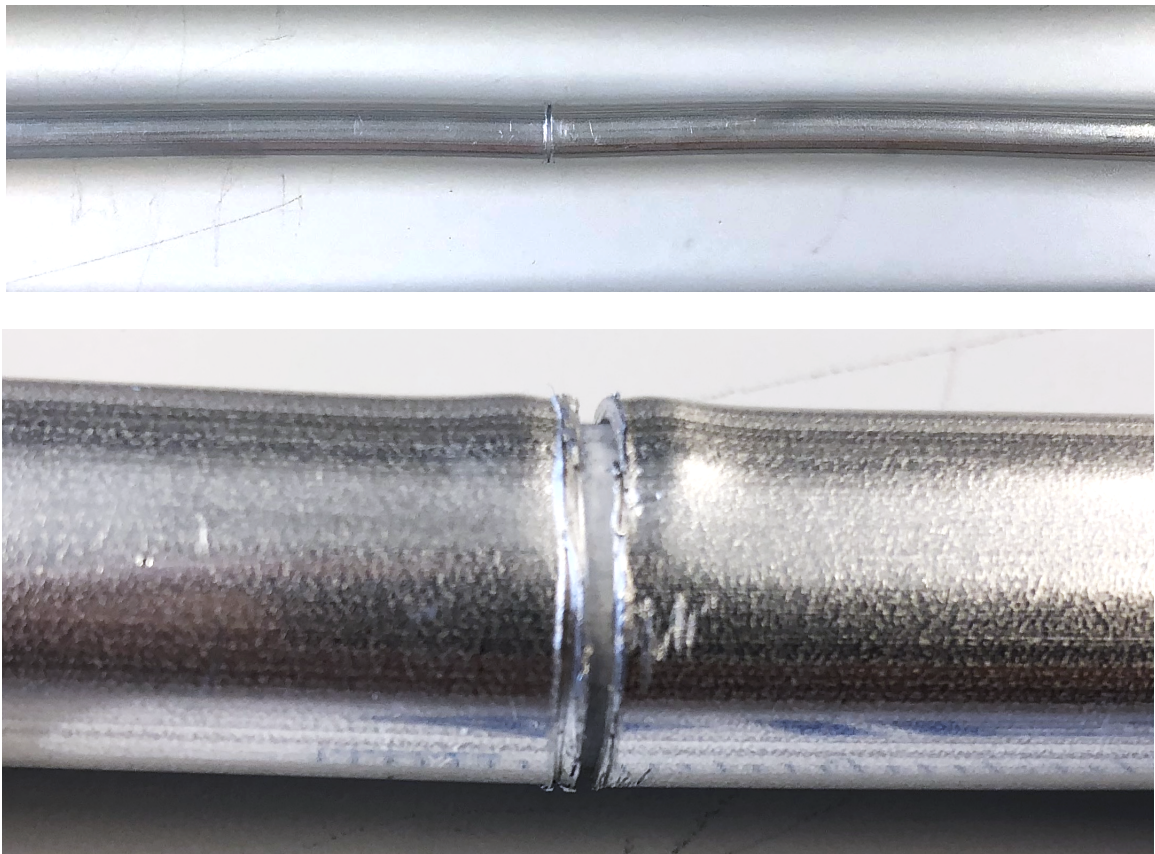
Radial cracked test cable (enlarged view, bottom)
